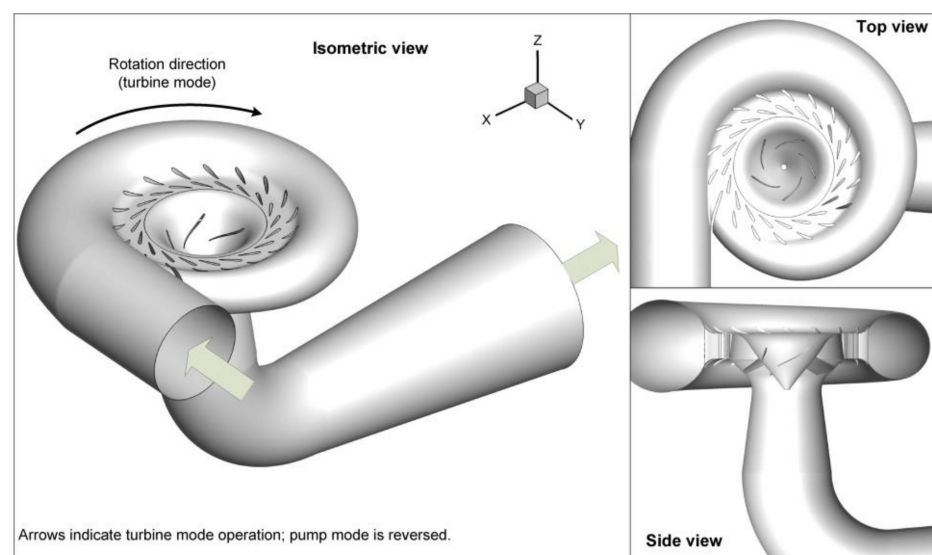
Views of the reversible diagonal turbine, showing details of the design such as the two rows of stator blades, the five-bladed runner and the draft tube.
